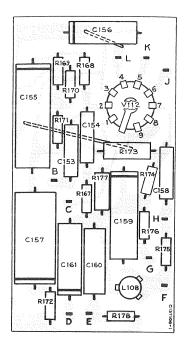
PC105 Horizontal Oscillator Assembly Layout
